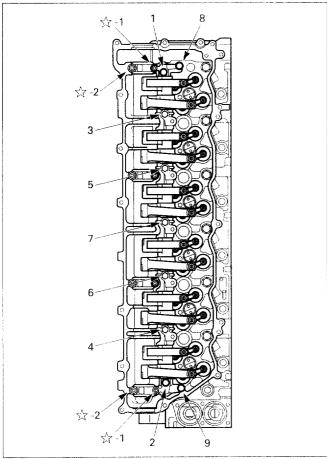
Valve Rocker Arm Shaft Tightening Sequence
